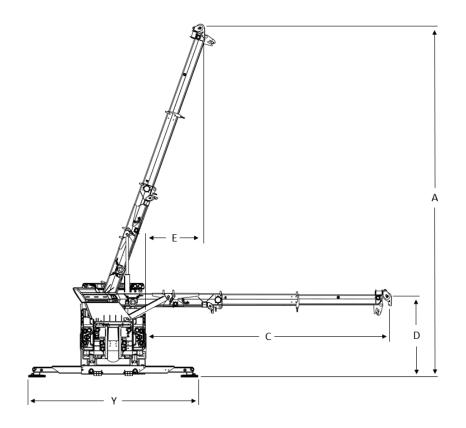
BOOM AND OUTRIGGER DIMENSIONS - REAR VIEW (EXAMPLE)
